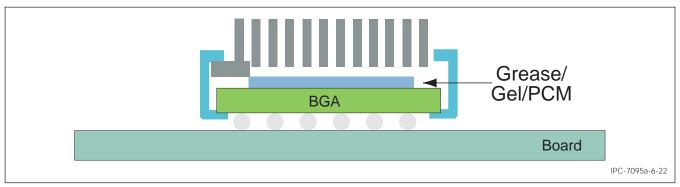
Heat Sink Attached to a BGA with a Clip that Hooks onto the Component Substrate
